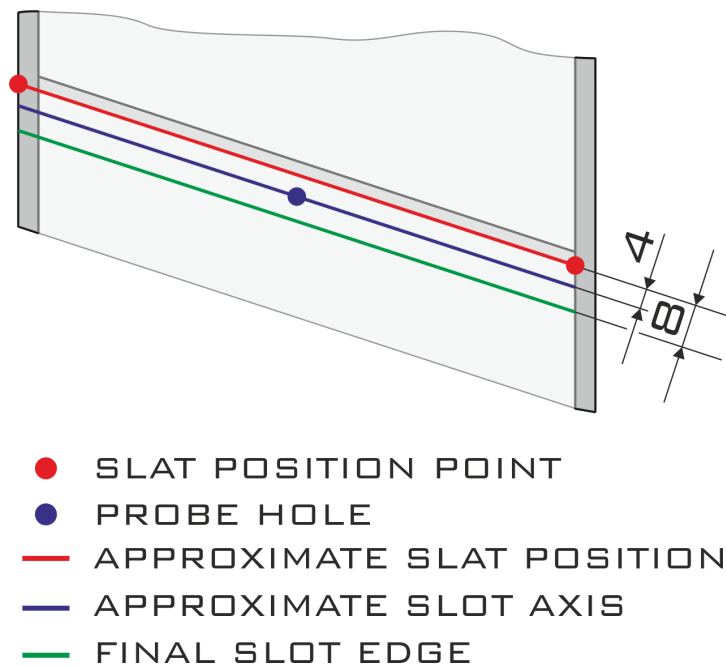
slot machining geometry (left side of spoiler, top view)
